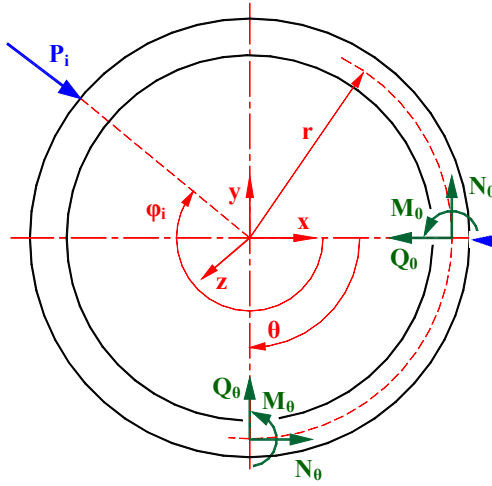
Clamping element loading in ring-shaped work piece clamping
